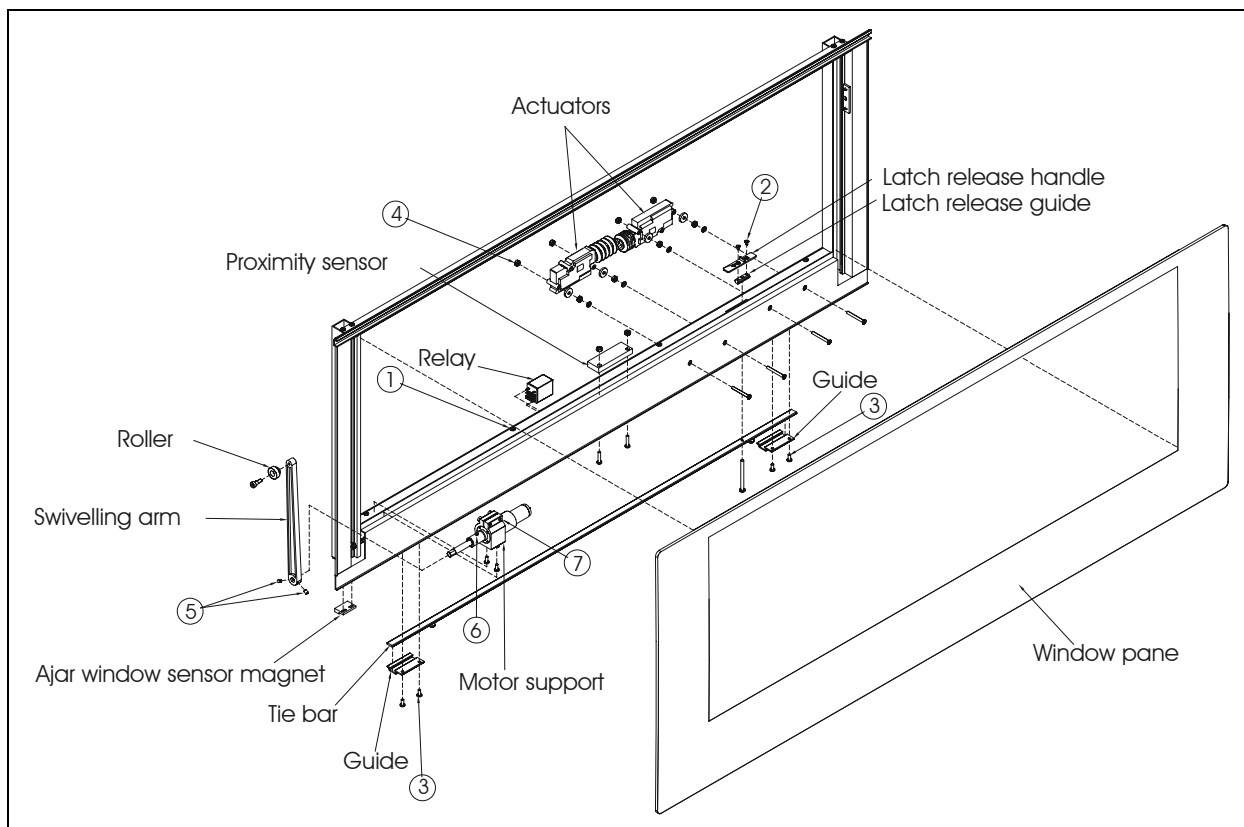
ELECTRIC AWNING WINDOW EXPLODED VIEW (SASH)
